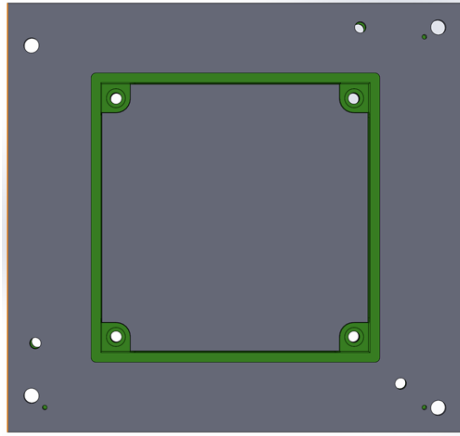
Bottom view of magnetorquer PCB showing the air-core magnetorquer frame
